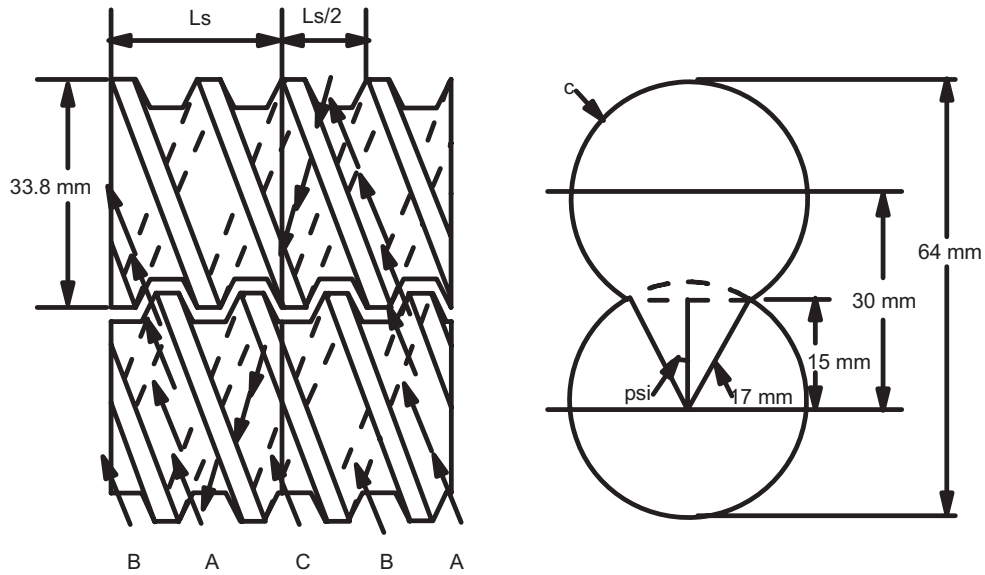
Self-wiping closely intermeshing corotating twin-screw extruder. Flow of material in double-flighted screw elements (left). Cross section of the barrel showing the pertinent dimensions (right).
